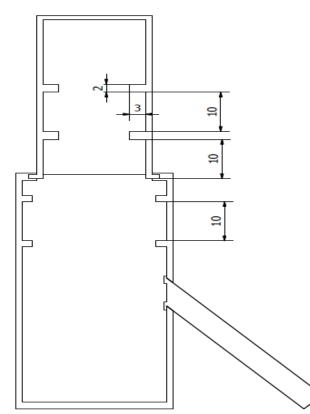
Constructional details of the solar dryer (All dimensions are in cm)
